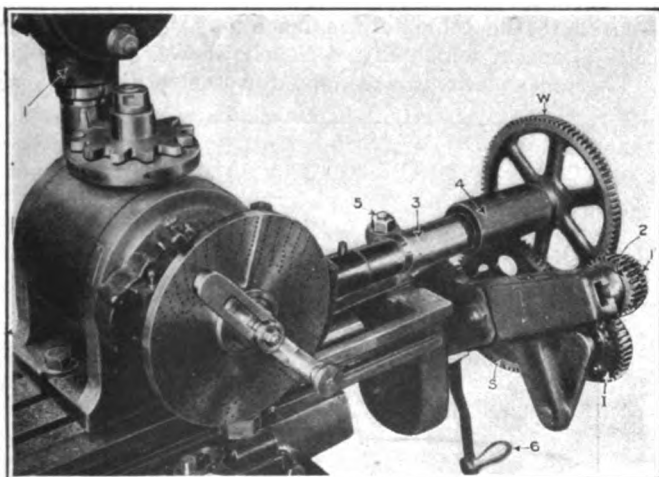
MILLING MACHINE ADAPTED TO CUTTING AN INVOLUTE CURVE ON GEAR TEETH
